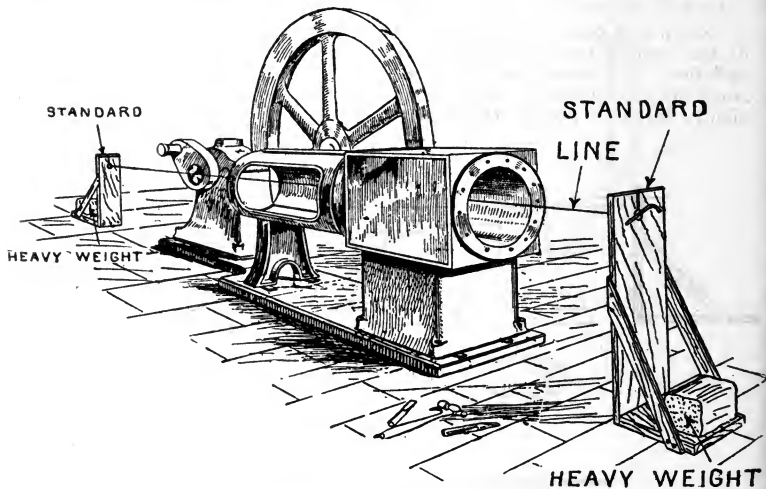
,139.—View of engine showing center line alignment wire secured in position by a standard at each end of the engine.
